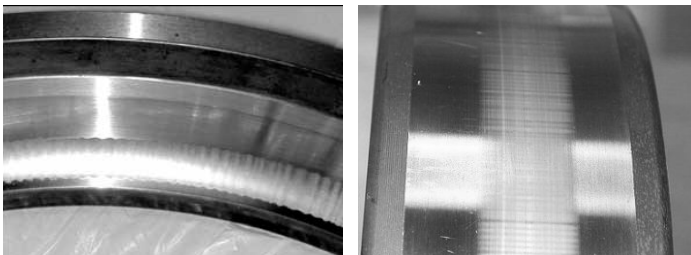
Electrical erosion or fluting in the bearing rings races due to EDM [109], [111].
